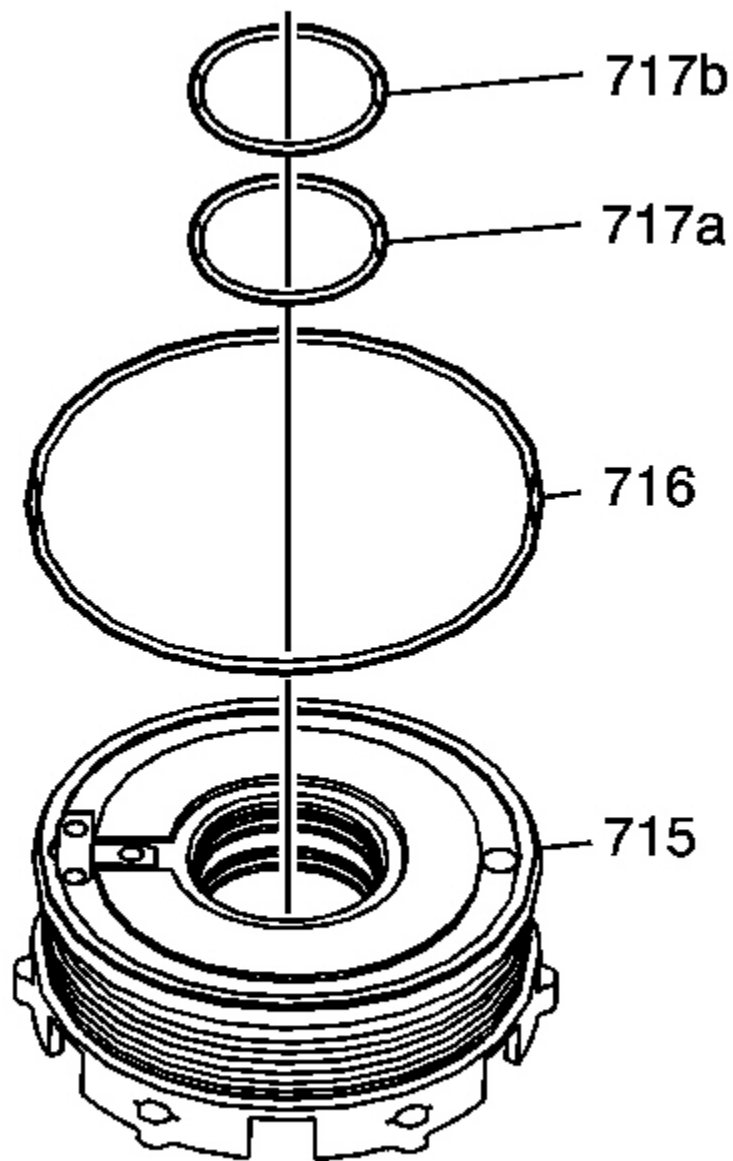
Installing Inner O-Ring Seals In 1st Clutch Piston
